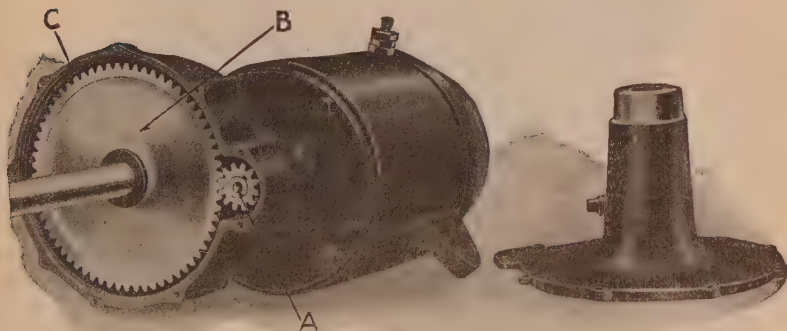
and 34. —Wagner starting motor of two unit starting and lighting system. It is series wound, and equipped with reducing gear, with a gear reduction for reducing the speed of the motor so that it will be suitable for cranking the engine. This gear equipment consists of a small steel pinion A on the motor which meshes with a large steel gear B on the back shaft, thereby reducing the speed. These gears are encased in the cast iron housing C. The motor is connected to the engine by means of a chain which operates from a sprocket on the starter to a sprocket on the engine shaft. The motor is adapted for electrical connection to the battery by means of a starting switch. This switch is usually installed on the foot board of the car, and when the pedal is pressed down, contact is made between the battery and the starter, thereby cranking the engine.
